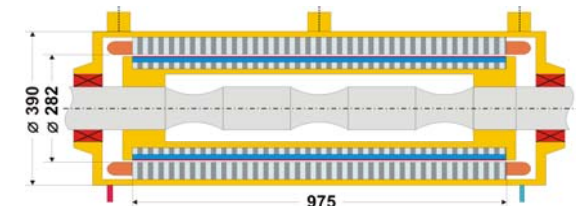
Cross section of a direct drive modular synchronous machine with the rotor directly mounted on the axle shaft of a metro wheel set
